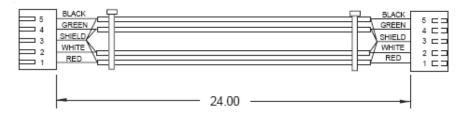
EC1942-01 HARNESS ASSEMBLY - ACCESSORY BOARD TO PREAMP AUX INPUT
